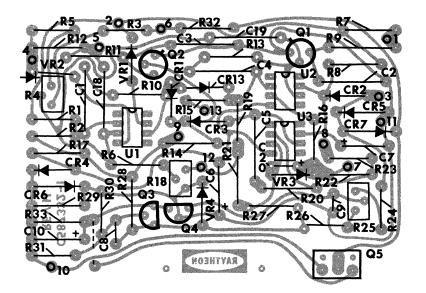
B Typical PC Card Assembly (Module II Shown)
